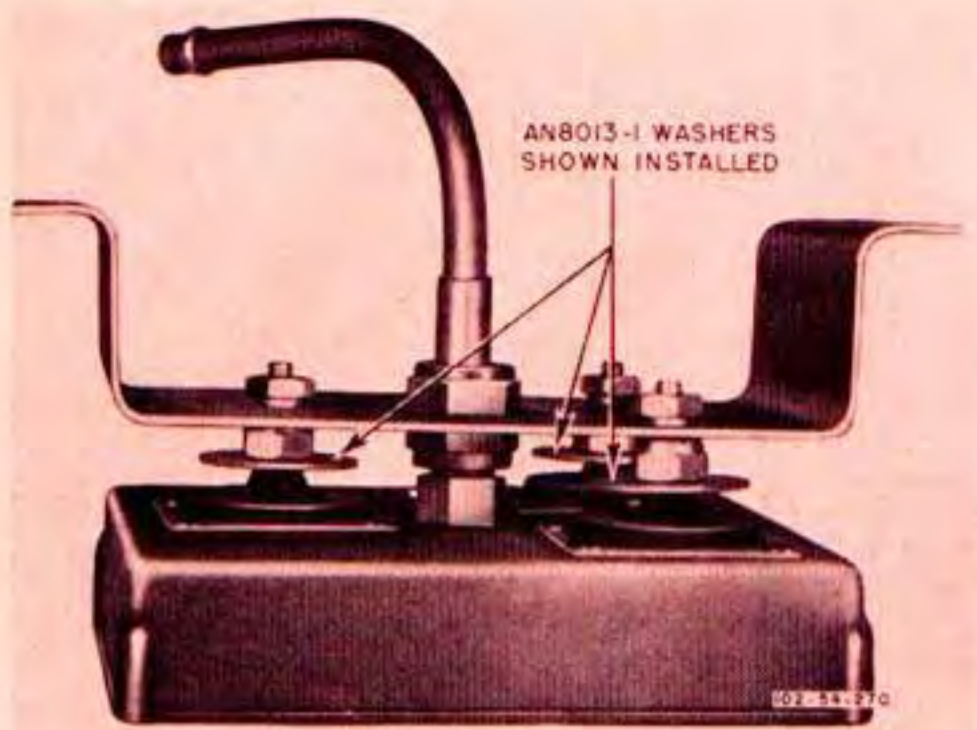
Installation of Washers on Delco Aneroid Switch Bracket
